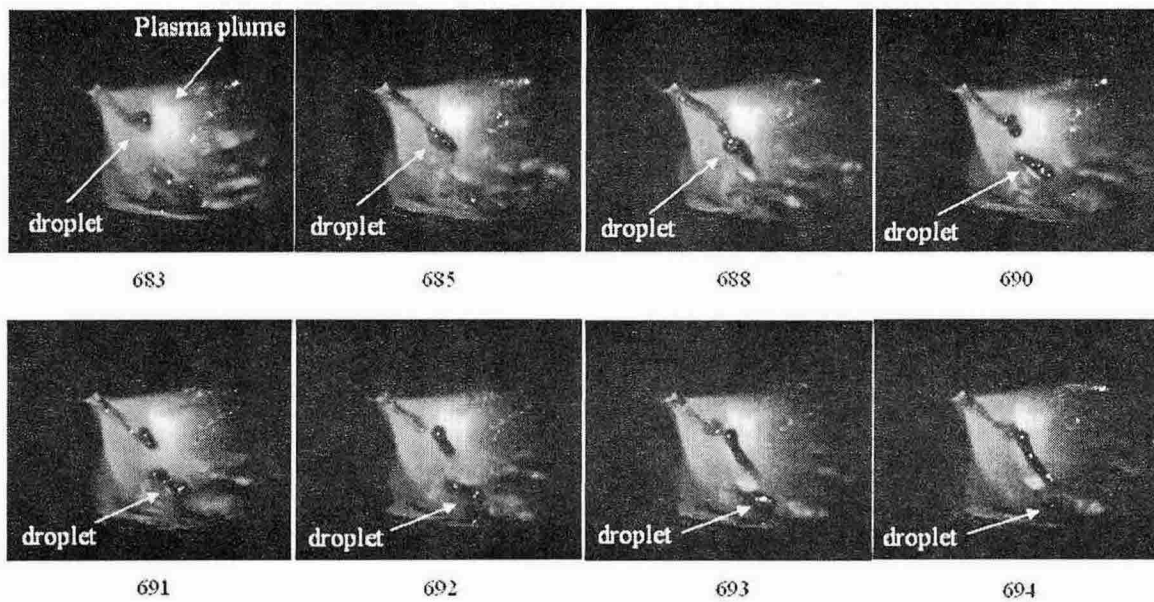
Phenomena of hybrid welding with zero separation
